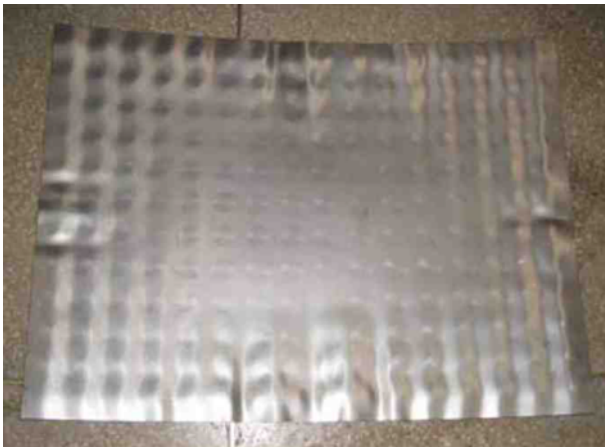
Example of sheet metal with dimples and wrinkles formed by using multi-point forming process
